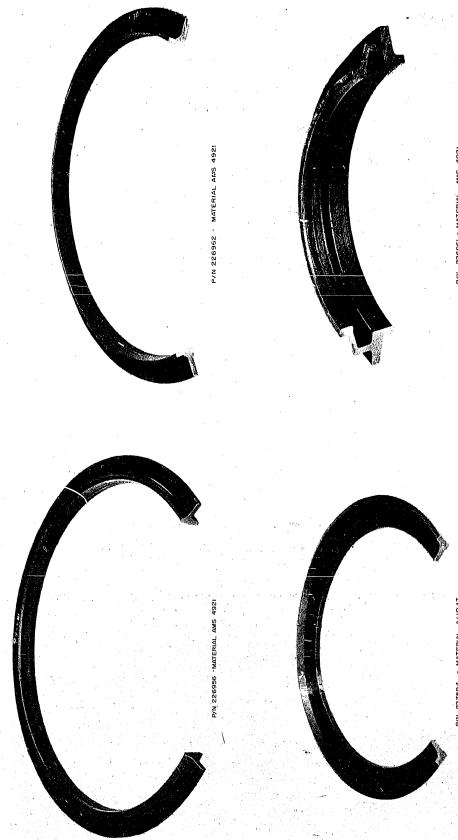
PHOTOGRAPHS OF SECTIONS OF SEVERAL OF THE FINISHED PRODUCTION RINGS
